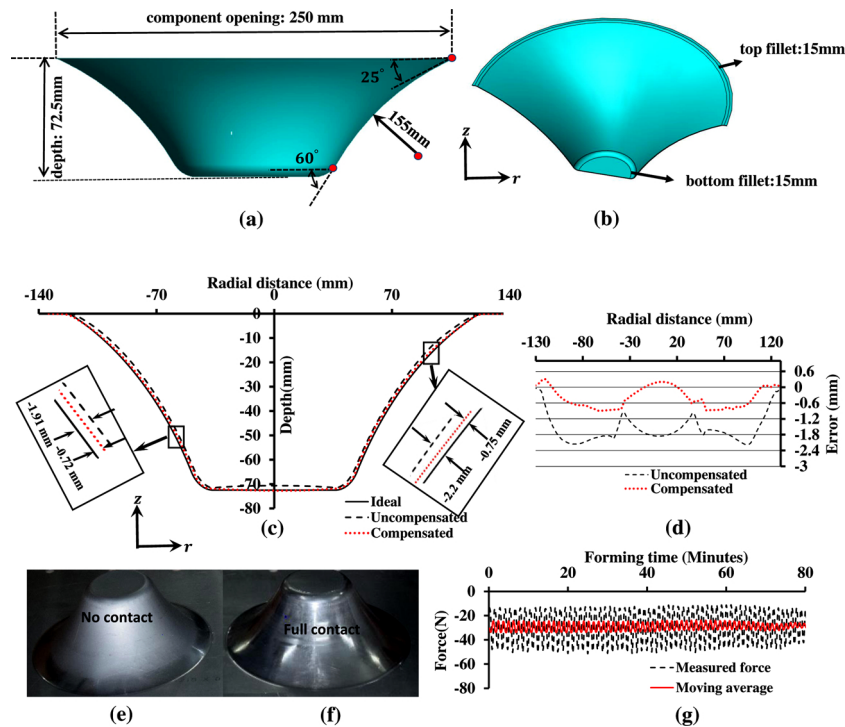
Varying wall angle component with 250 mm opening diameter (a), (b) CAD model and geometrical parameters, (c) profile comparisons, (d) profile error, (e) component formed using uncompensated tool path, (f) component formed using compensated tool path, (g) axial force on support tool.
